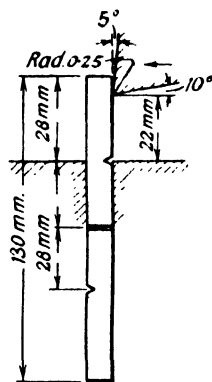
METHOD OF GRIPPING AND STRIKING TEST PIECE IN IZOD MACHINE
